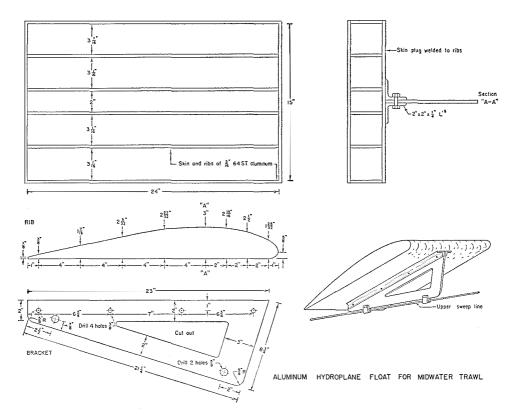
Details of construction of the pressurized aluminum hydroplane float.
